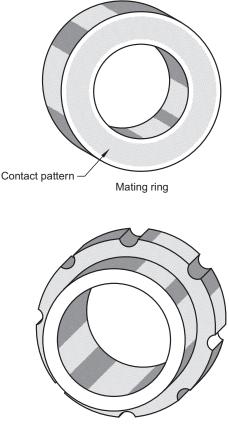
Rotating component rubbing against the stationary component which causes mechanical seal failure.
